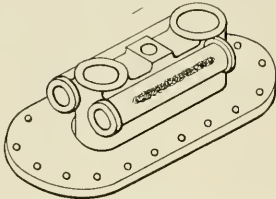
Air Compressor Steam Head Reclaimed by Gas Welding
